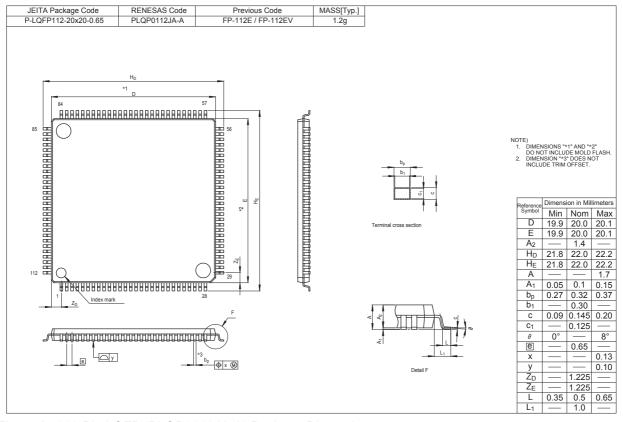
Pin LQFP (PLQP0112JA-A) Package Dimensions
